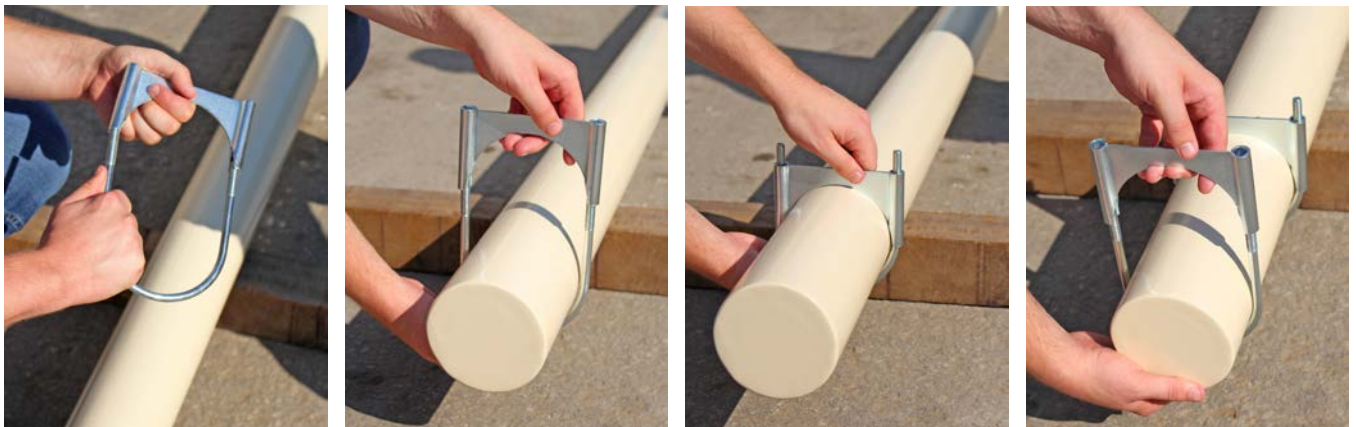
Assemble and Install Clamping U-bolts on Pole
